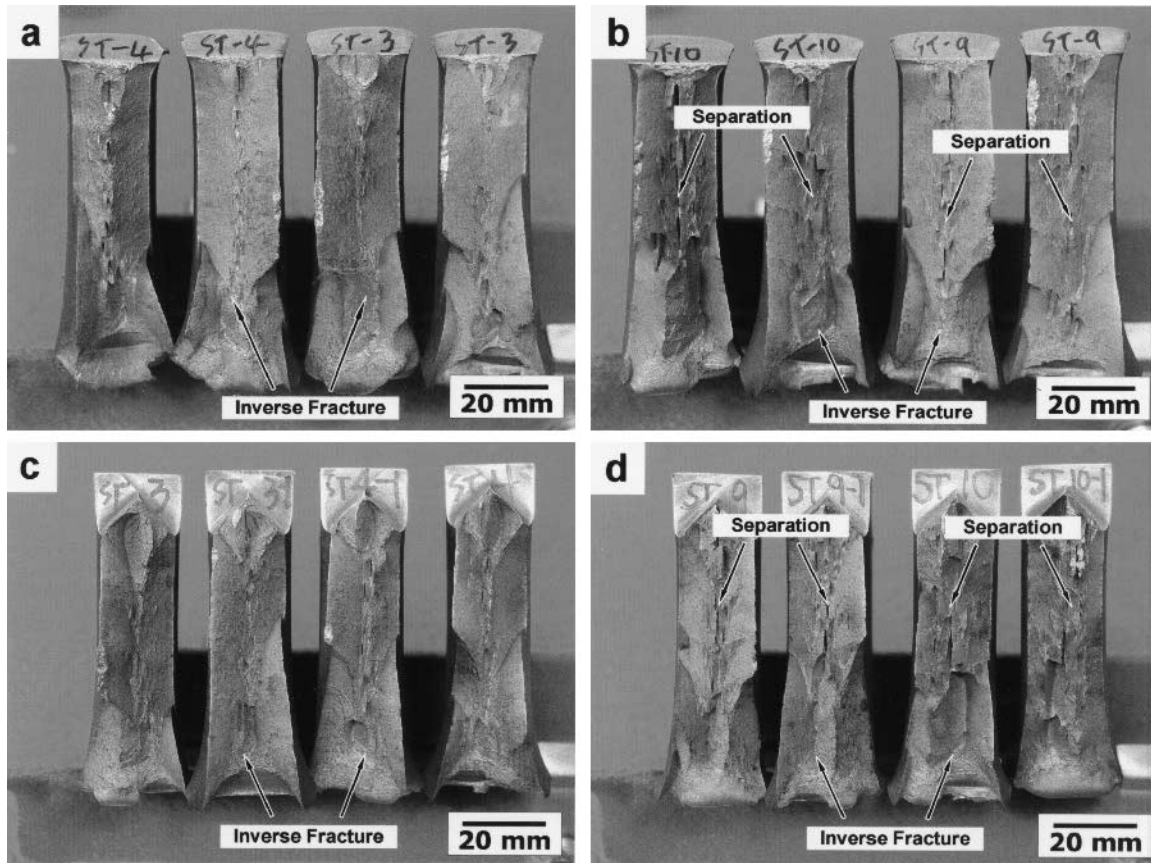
Overall fracture surfaces appeared in (a) and (b) PN DWTT specimens and (c) and (d) CN DWTT specimens.
